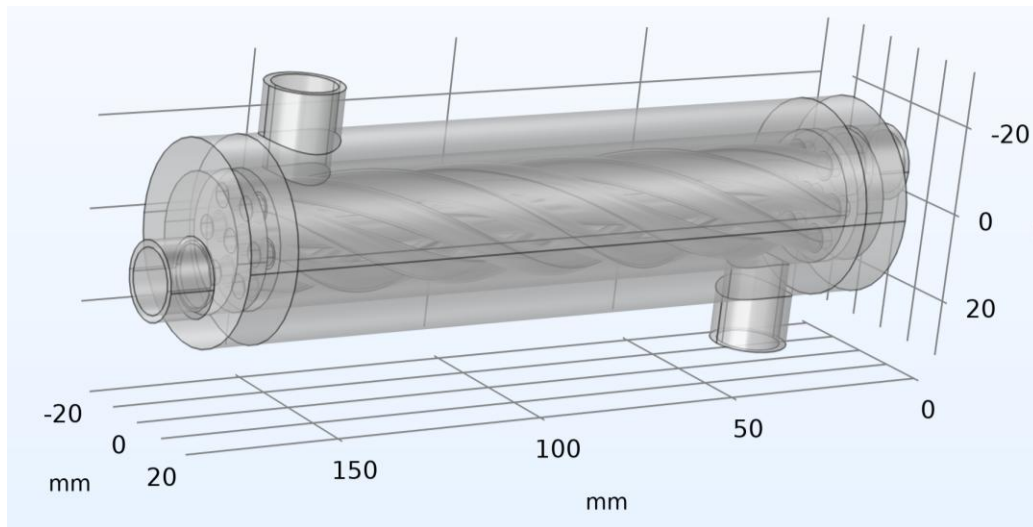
Finished COMSOL geometry sequence showing the twelve constituent domains and the helically swirled inner tube passage
